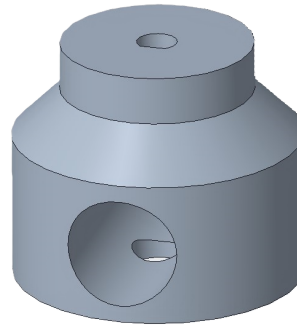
Zoomed-in CAD design of the motor-valve coupler.
